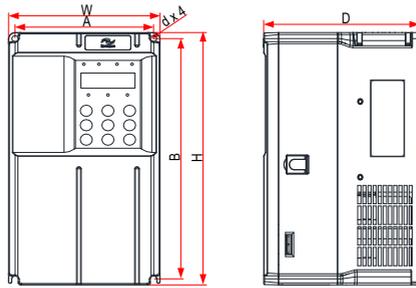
Exterior dimensions and mounting dimensions of 0.4-15 kW AC drive models
